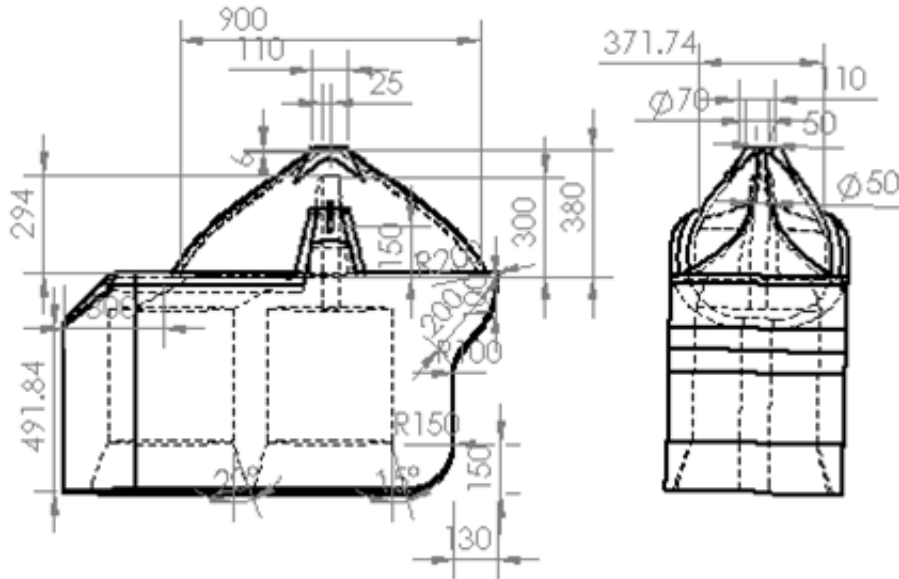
The 56 design; two views of the design. Dimensions are in microns.
